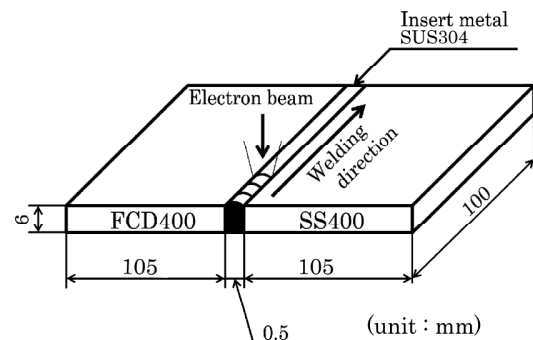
Joint configuration of SUS304 insert-type welding.
